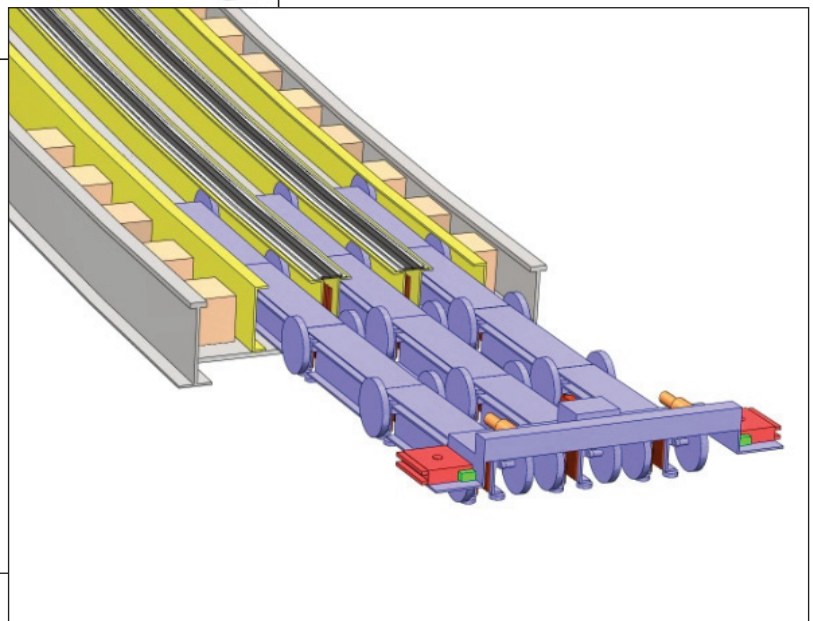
shows the main drive moving magnet assembly (blue) with articulated sections, guide wheels and brakes (red).
